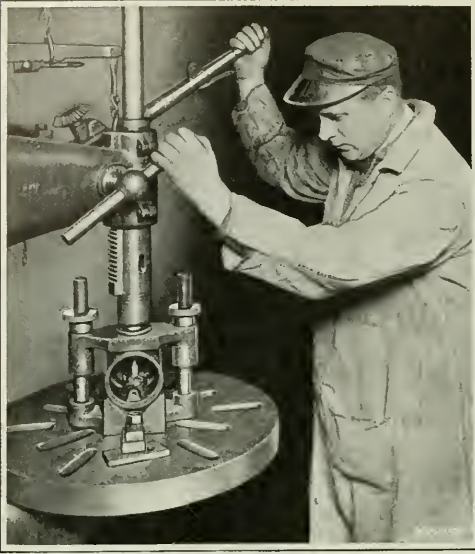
Drilling Machine and Fixture used for holding Pistons while facing the Wrist-pin Booses
